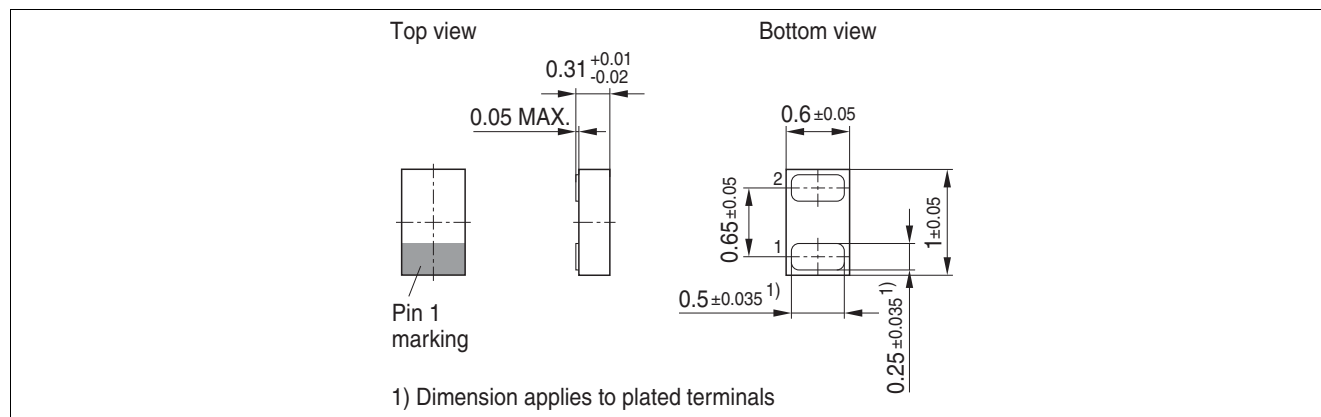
TSLP-2-20 Package outline (dimension in mm)
